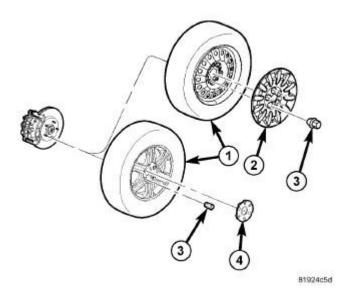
Tire & Wheel Assembly Components Courtesy of CHRYSLER GROUP, LLC
